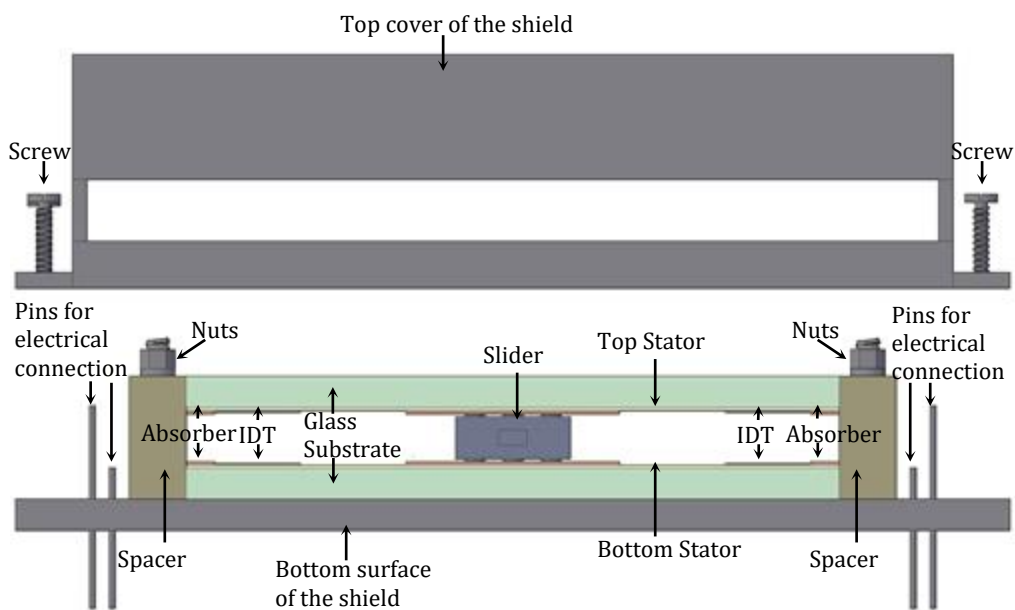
30: Schematic front view of the assembly of the dual drive SAW linear motor.
